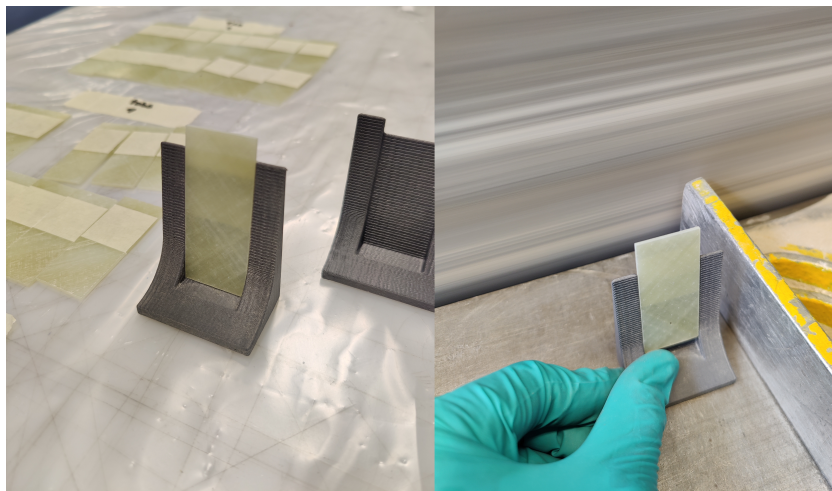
Initial pre-cut 0/90 specimen strips.
